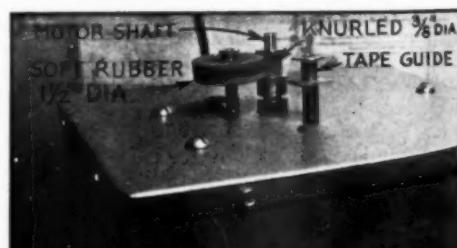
TAPE PULLER SHOWING KNULED BRASS SHAFT AND RUBBER WHEEL AND TAPE GUIDE
